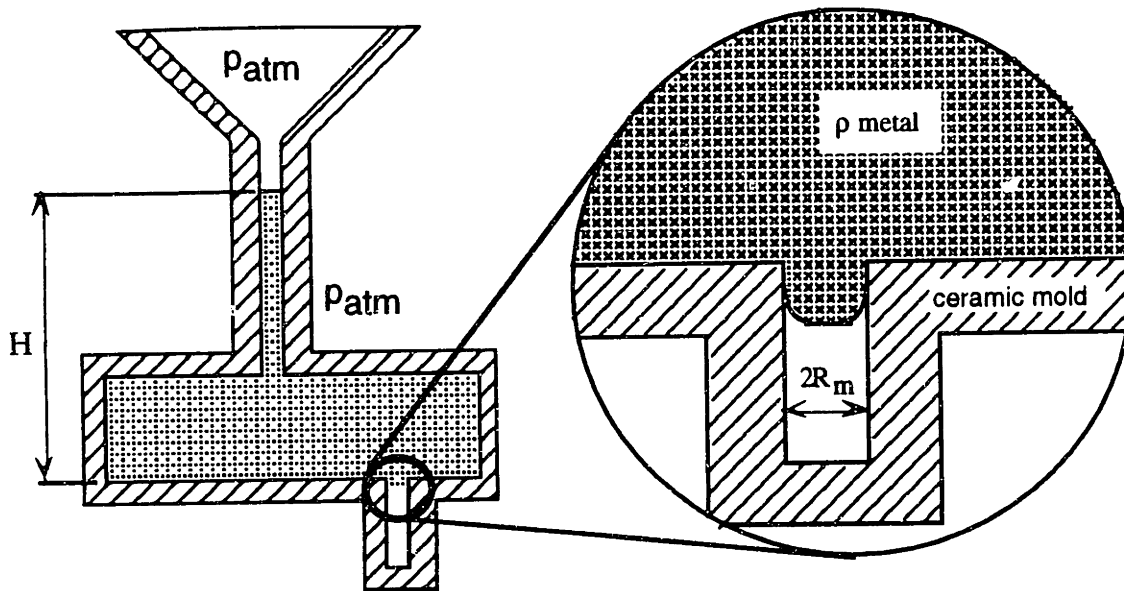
Investment casting of a mold with a small cylindrical cavity of radius R_m .
